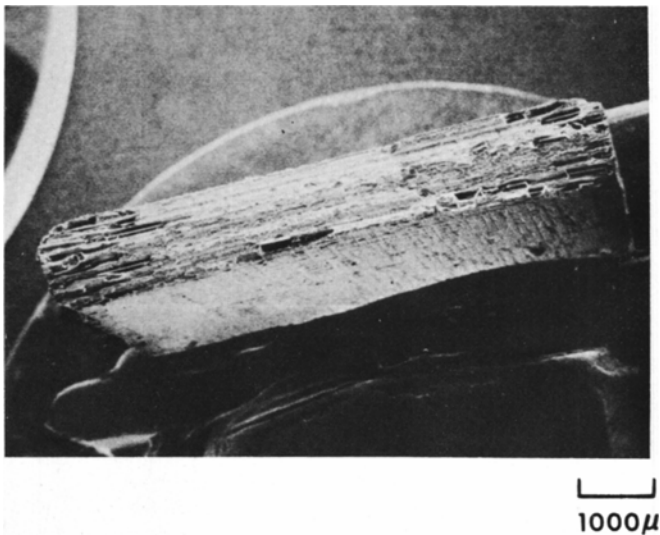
Fracture surface of a 48 pct vol fraction 4.2 mil BORSIC-1145/1100 transverse tensile specimen.
